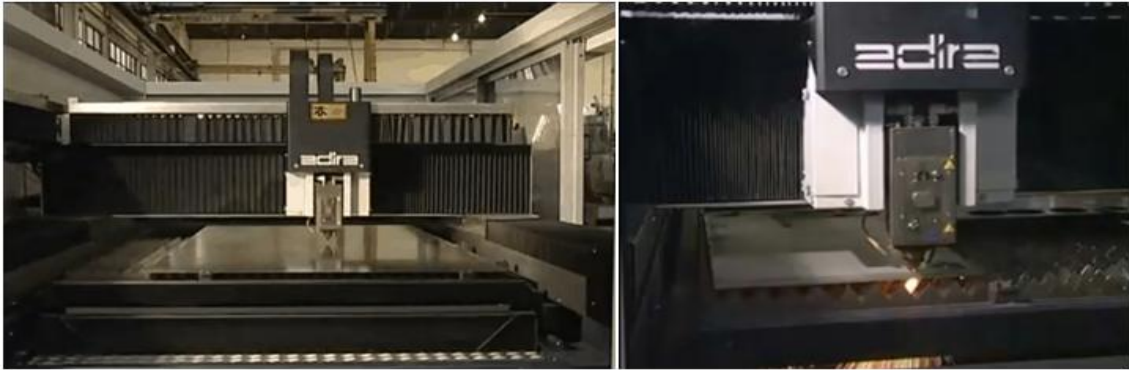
Laser beam of the laser cutting machine (running a cut)
